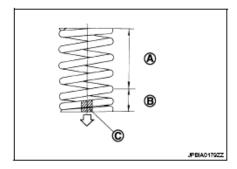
Identifying Valve Spring Courtesy of NISSAN MOTOR CO., U.S.A.
